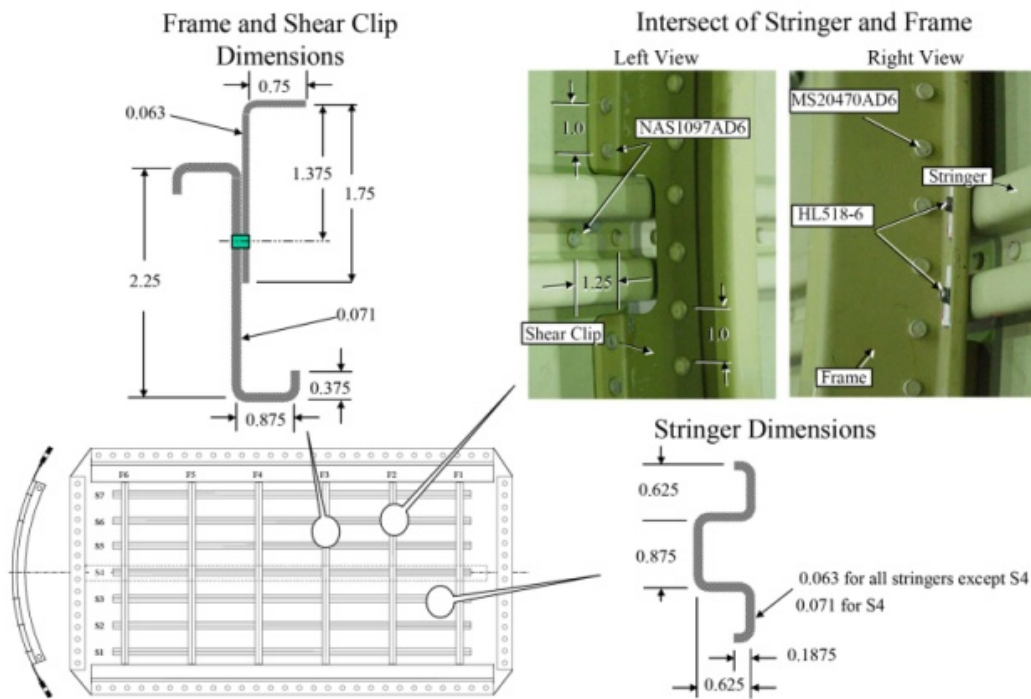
Dimensions of frame, stringer and intersect of stringer and frame, [3].
